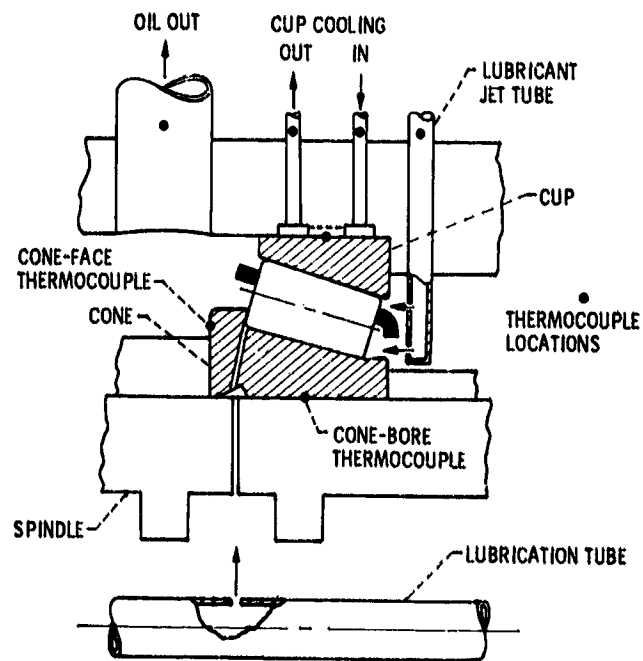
Tapered-roller bearing with cone-rib and jet lubrication. (From [18].)
